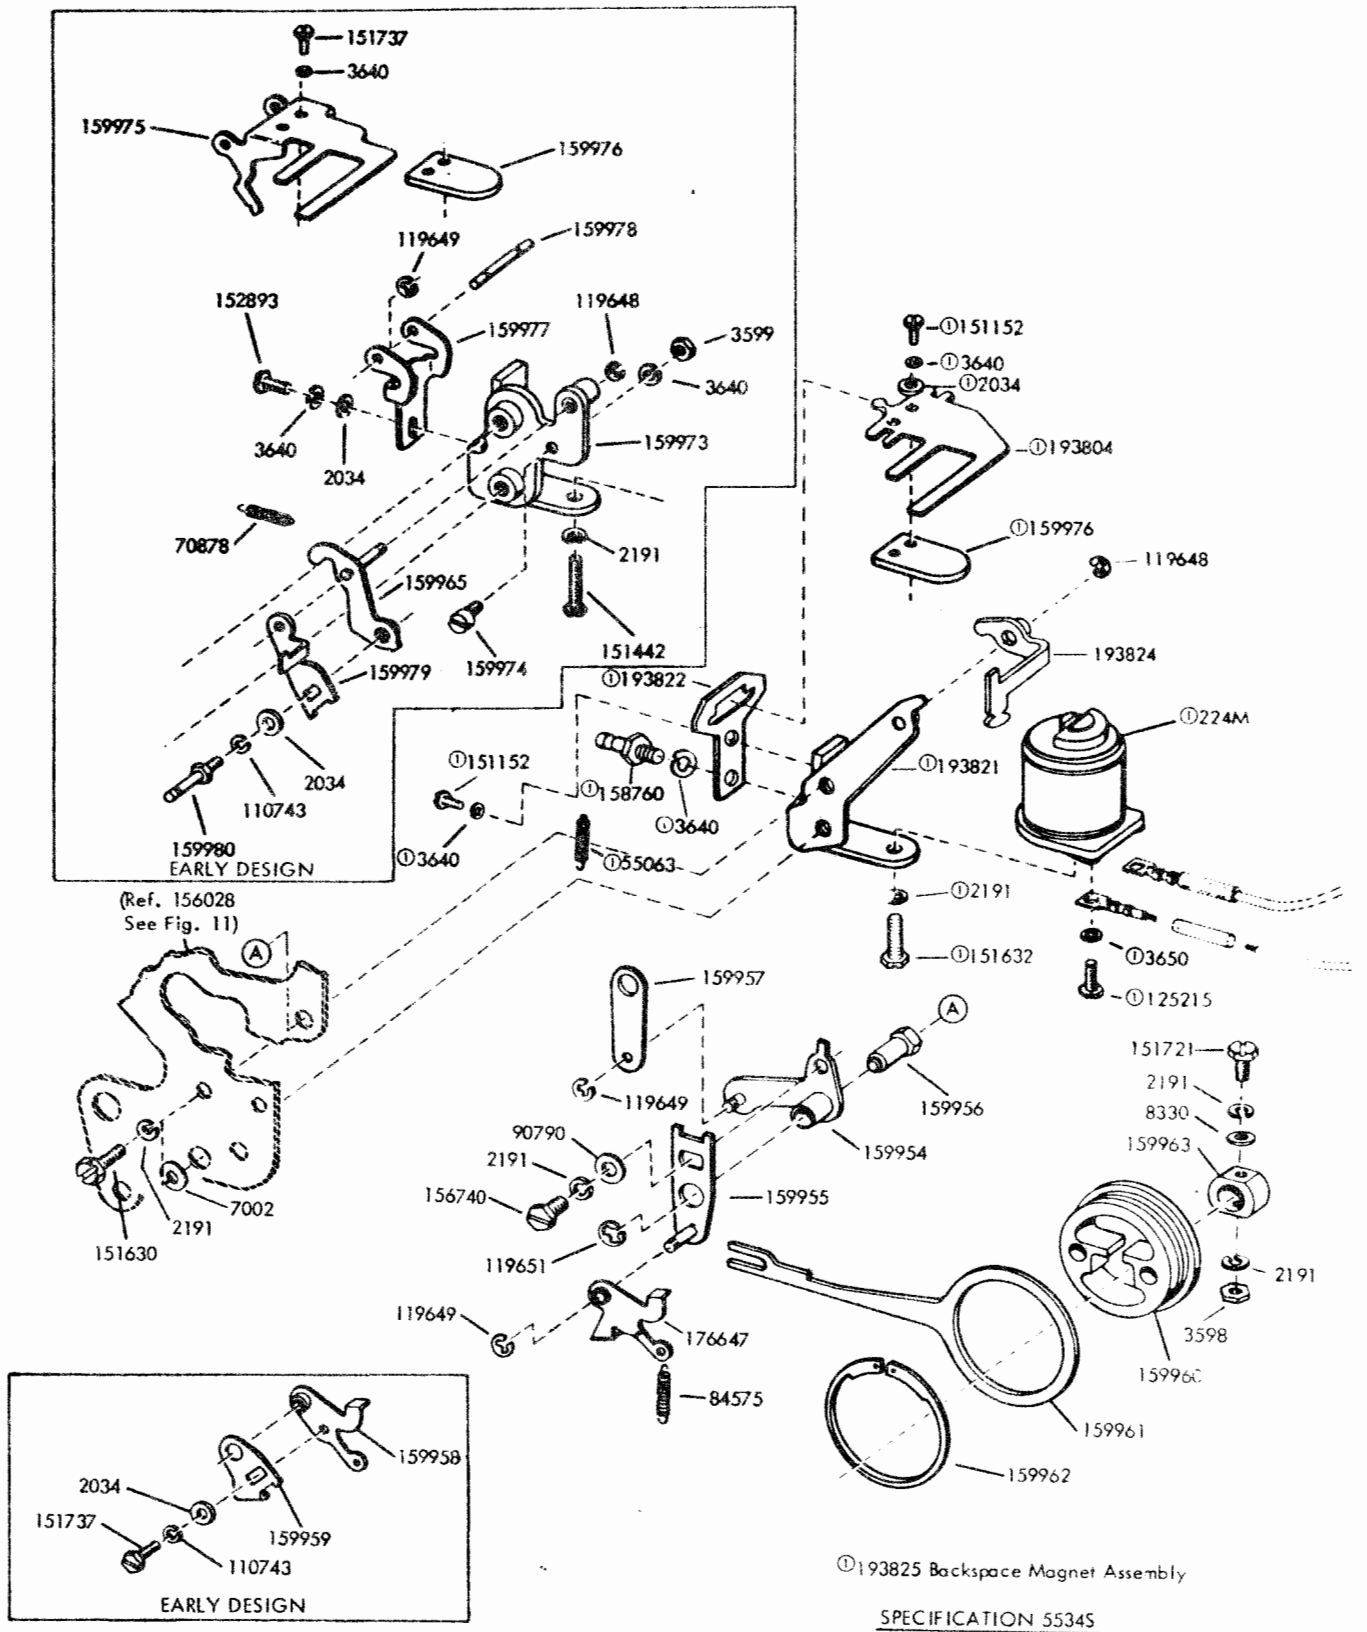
159364 MODIFICATION KIT TO ADD POWER DRIVE TO BACKSPACE
